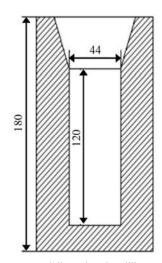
Casting geometry and dimensions in millimeters شكل 2 هندسه و ابعاد قالب ريخته گرى برحسب ميلىمتر
